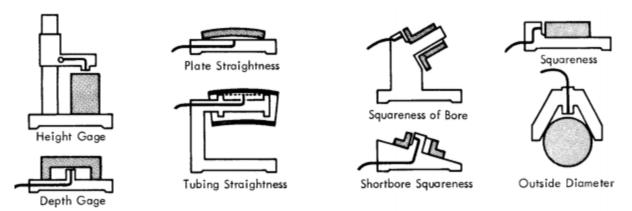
Single jet nozzles form the basic gaging element as in these examples.
